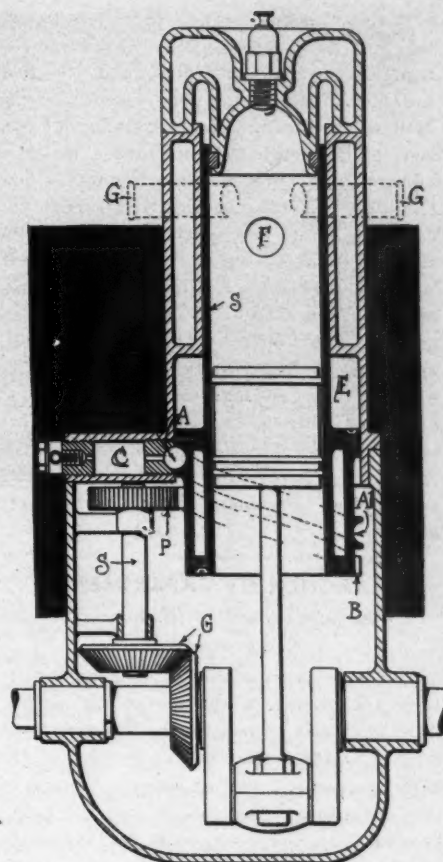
SECTIONAL VIEW OF C. L. C. MOTOR
